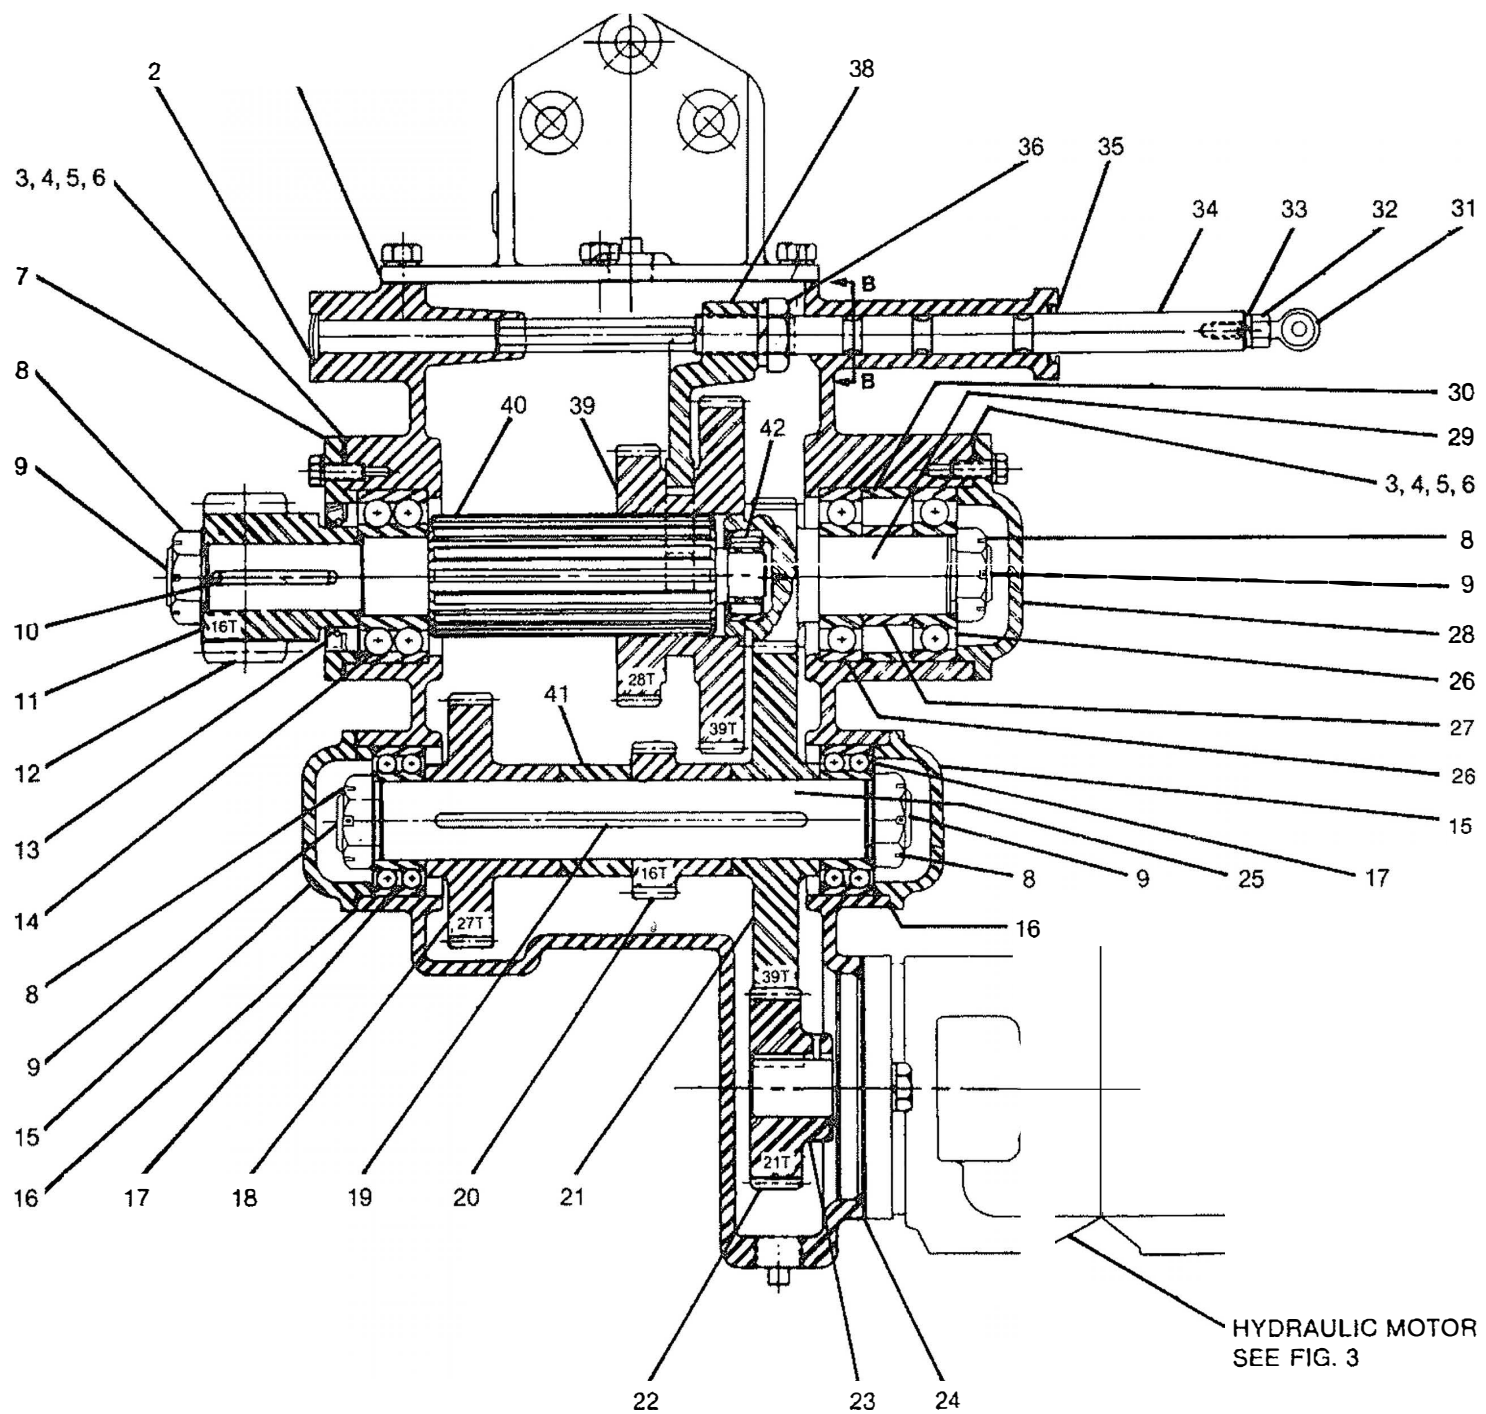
GENERAL ASSEMBLY PARTS DRAWING
